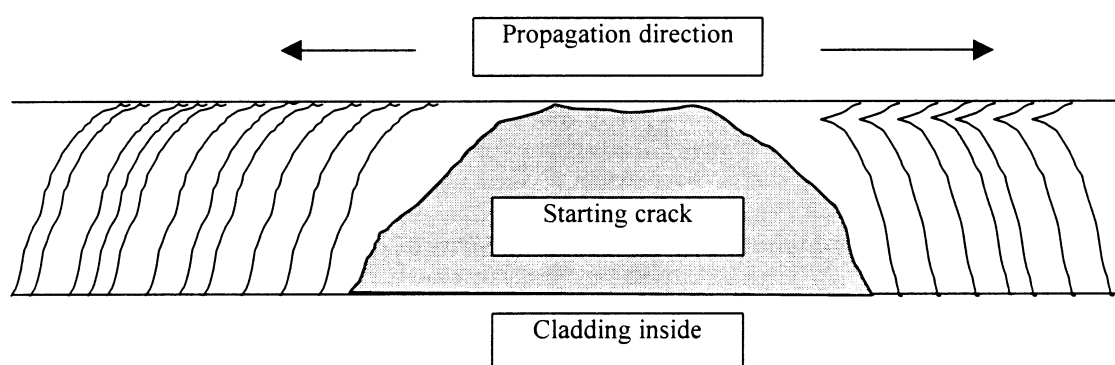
Macroscopic striations on the fracture surface in relation to the starting crack.
